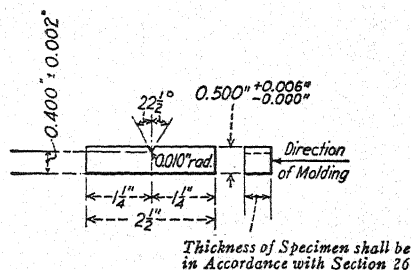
Cantilever Beam (Izod) Impact Test Specimen.
